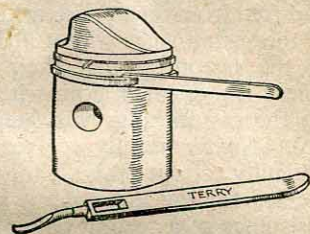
If, by any chance, a piston ring is gummed solid in its groove, use of this special tool will probably free it. Before the ring is refitted, both it and the groove should be carefully cleaned by scraping
